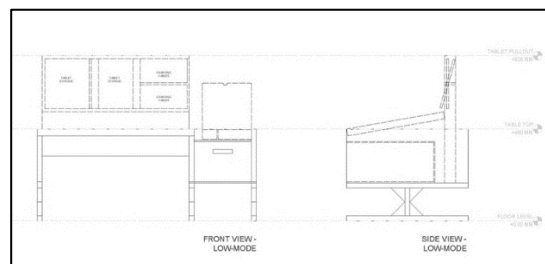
(Left) Desk's Front View (Right) Side View. Both in the lowest mode.
